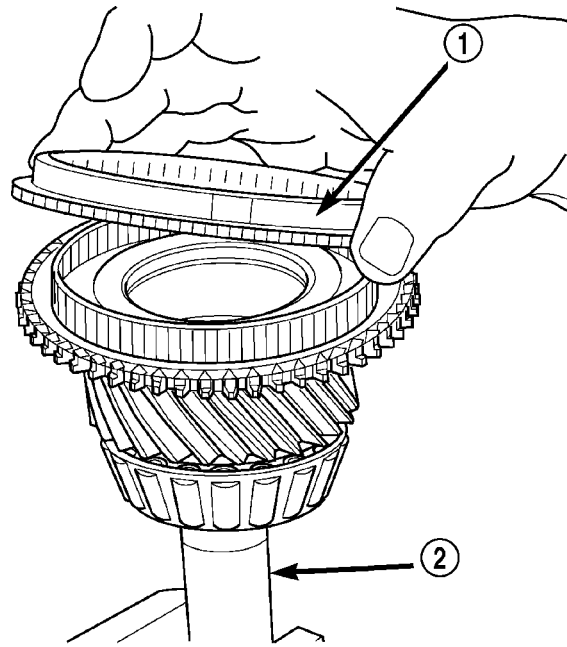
OUTPUT SHAFT POCKET BEARING
